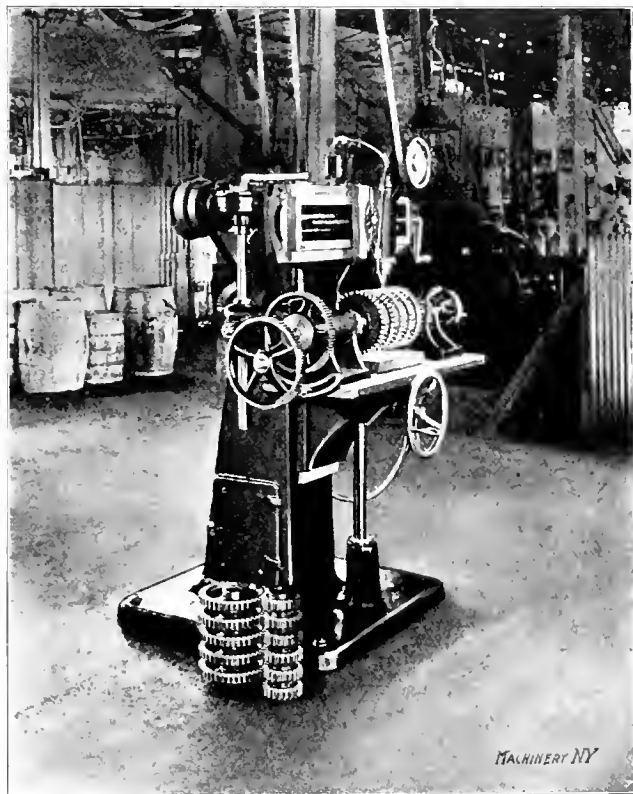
Chamfering the Teeth of Spur Gears in the Winton Factory
